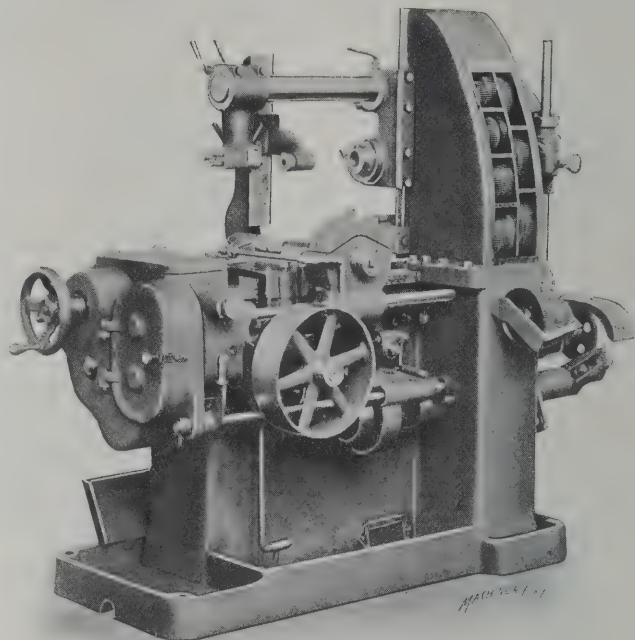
Rear View of No. 3 Machine, showing Driving Connections
